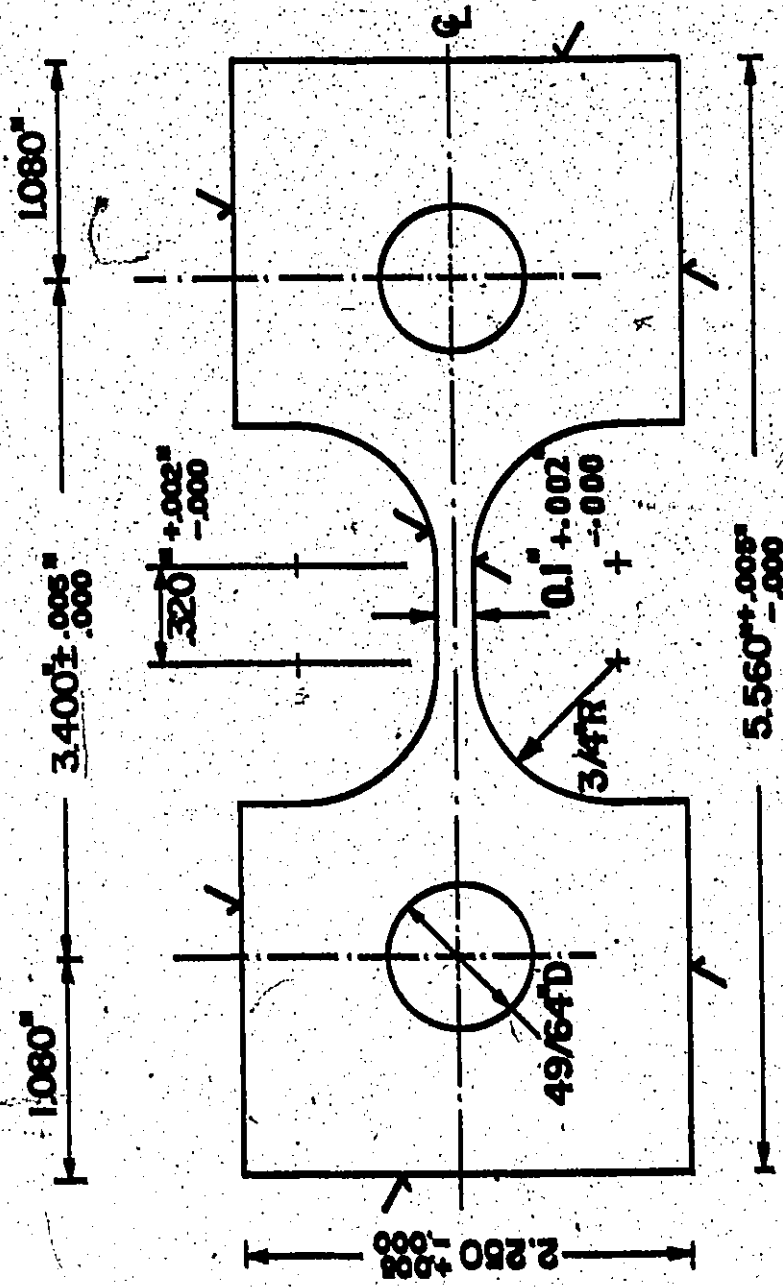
Configuration and Dimensions of the Axial Fatigue Specimen.
